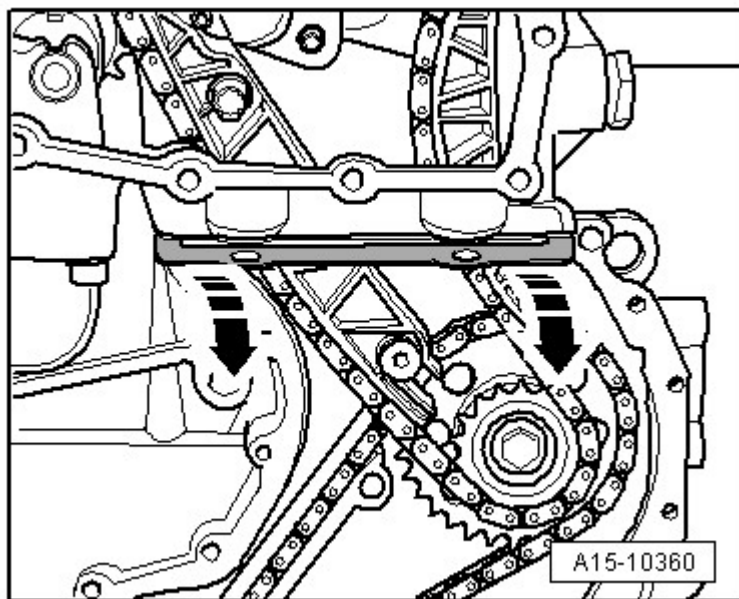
Bending End Of Cylinder Head Gasket Down Slightly
